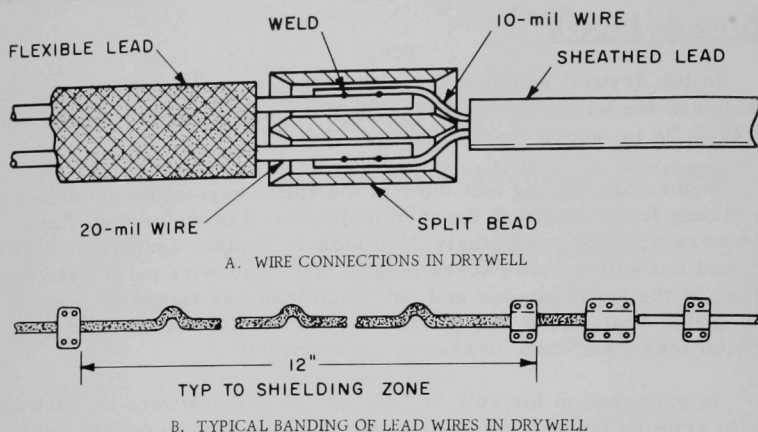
Typical Wiring in Drywell of Subassembly XX01
